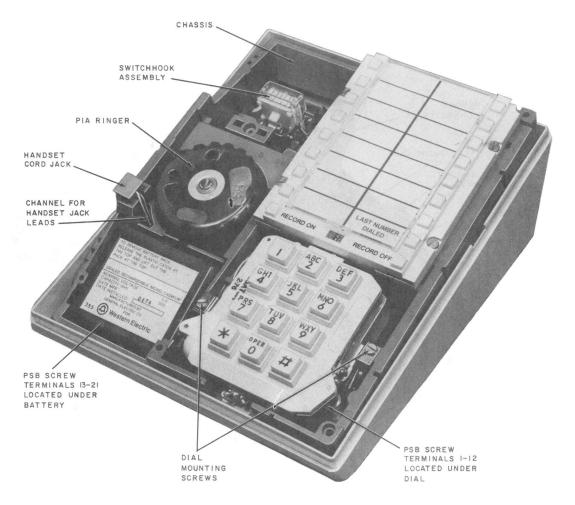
2960A01M Telephone Set With Handset, Faceplate, Shield, and Upper Housing Removed
